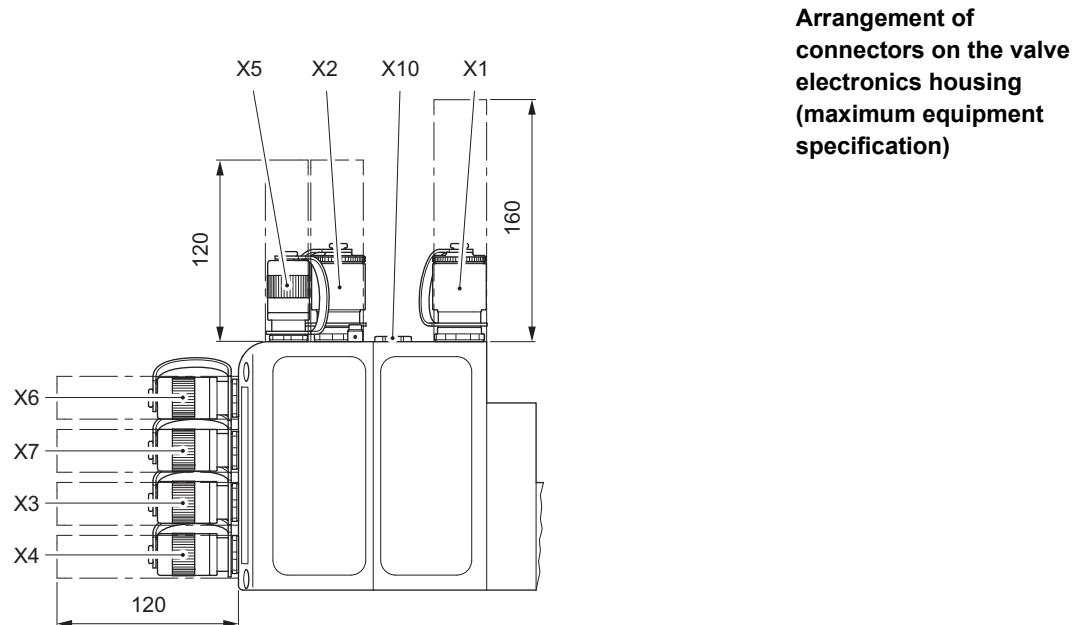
Arrangement of connectors on the valve electronics housing (maximum equipment specification)
